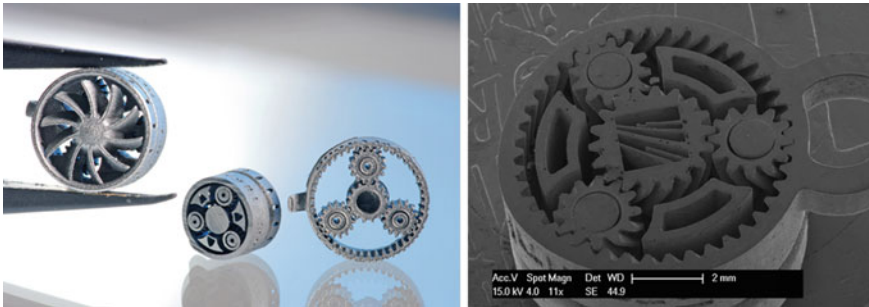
Planetary gear made of 316L, manufactured in one piece without the need for assembly
